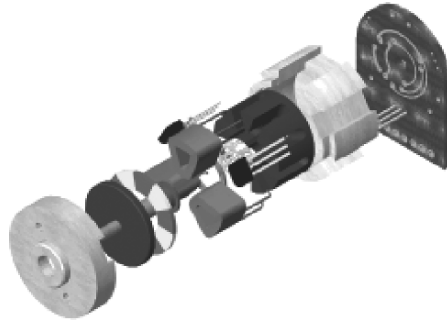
Construction of penny-motor: 1 — shaft, 2 — soft steel yoke cover, 3 — PM ring, 4 — ball bearing, 5 — stator winding, 6 — flange, 7 — bottom steel yoke.
